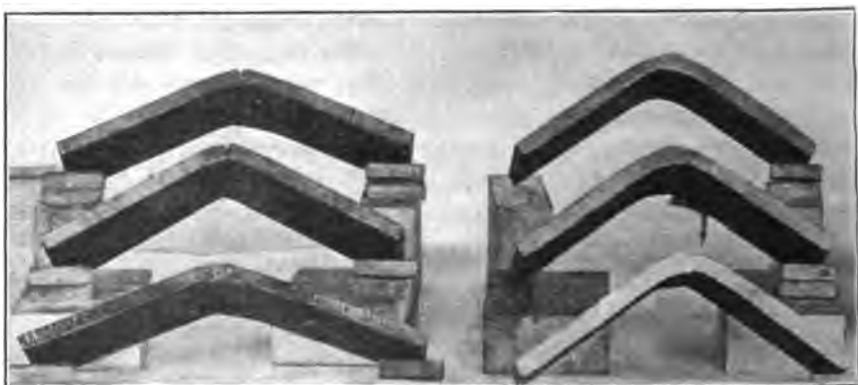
GAS AND ELECTRIC BENT SAMPLES. (GAS WELDS AT LEFT AND ELECTRIC WELDS AT RIGHT.)
